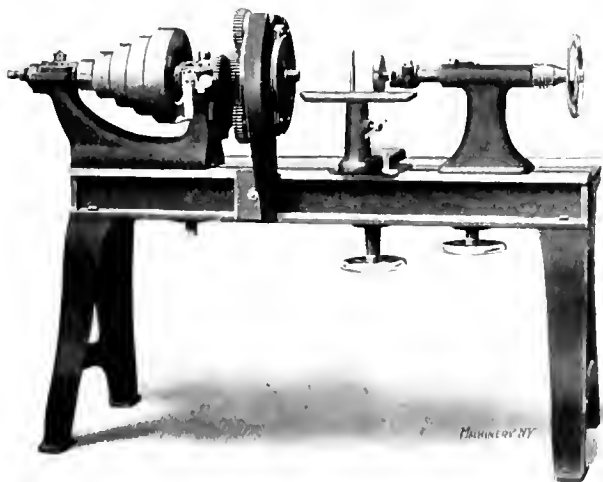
Elliptical Chuck mounted on Spinning Lathe
